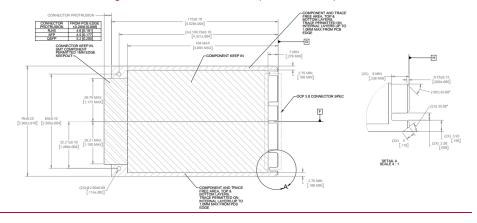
Small Form Factor Keep Out Zone – Bottom View
